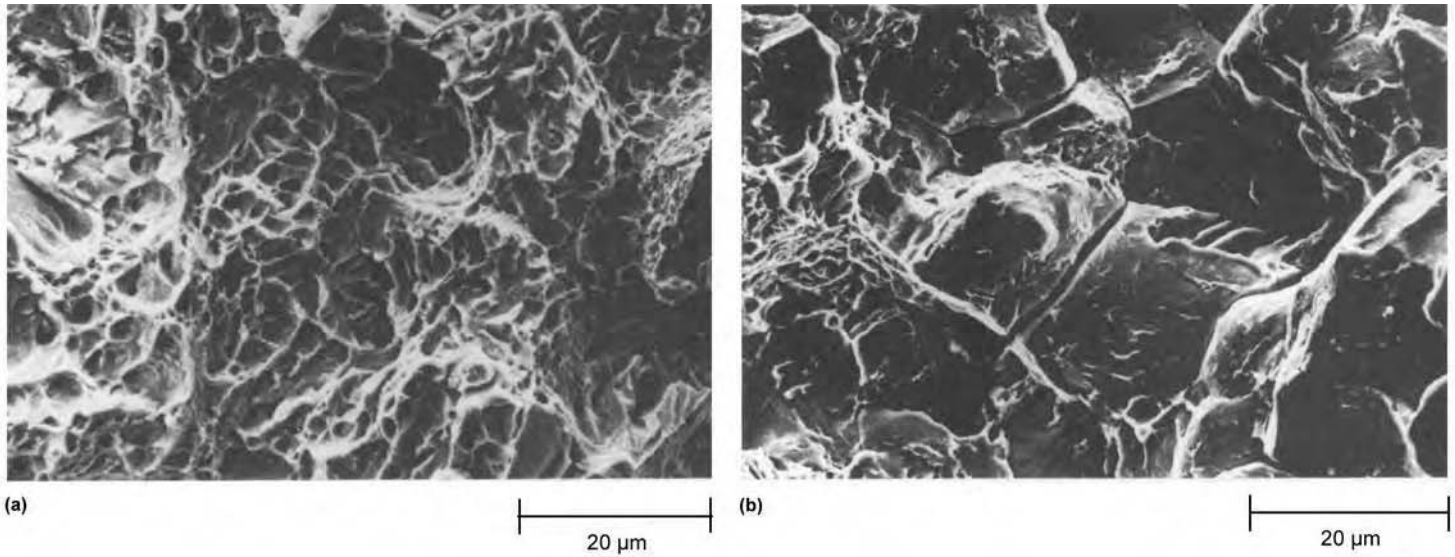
Effect of heat treatment on the fracture appearance of 10B53 steel. (a) Ductile fracture surface of specimen austempered to 53 HRC. (b) Brittle fracture of specimen quenched and tempered to 53 HRC. Courtesy of Vermont America Corporation
